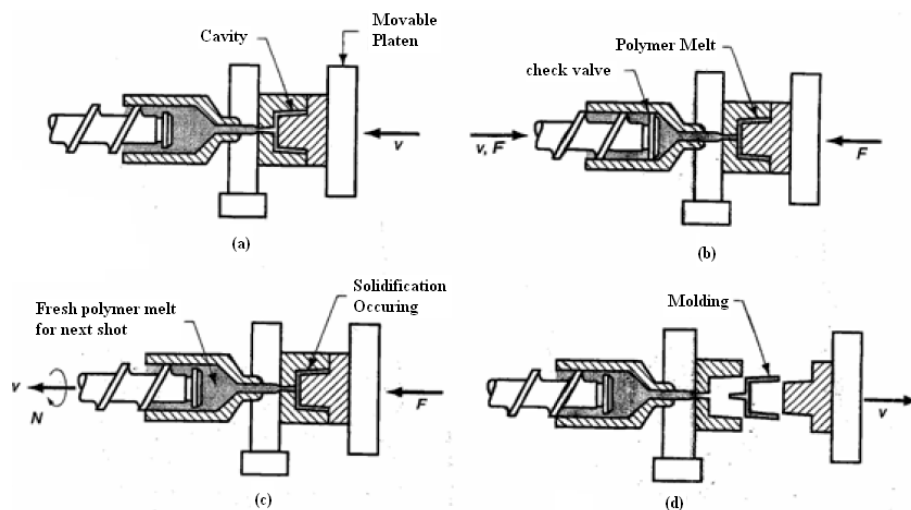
Injection cycle for a reciprocating screw injection molding machine
